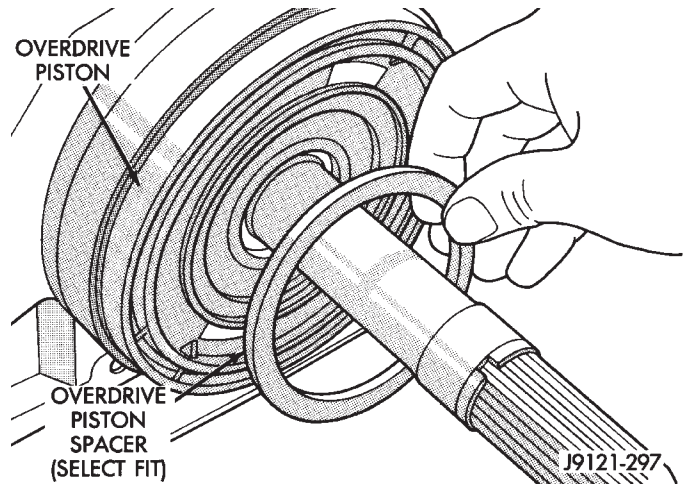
Overdrive Piston Thrust Plate Removal/Installation
